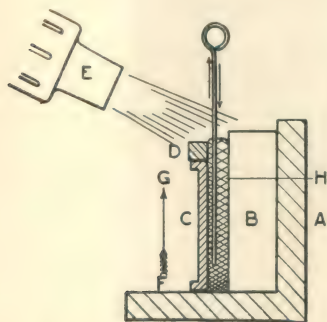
METHOD OF WHITEMETALLING A BEARING
